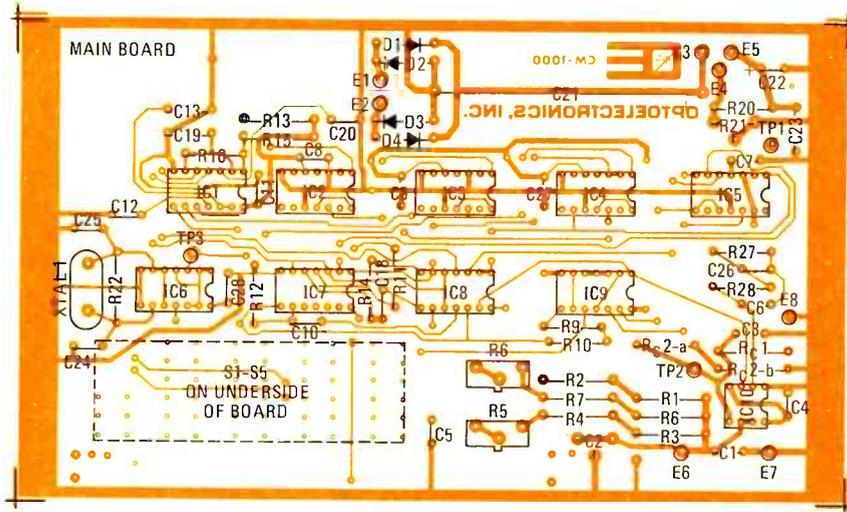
COMPONENT-SIDE foil pattern. Board supplied in kit has plated-through holes. Compensate for lack of hole plating if you make your own boards.
